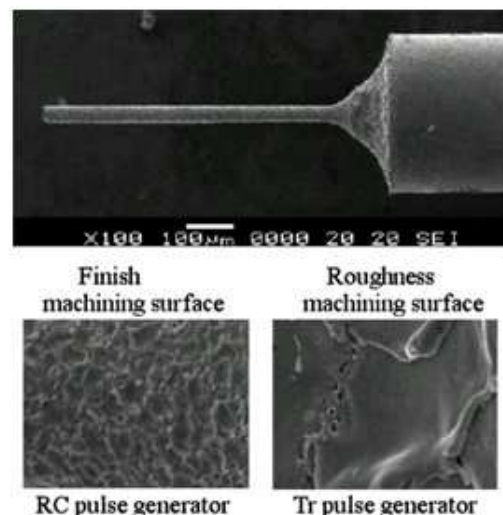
View of micro electrode tool machining by the twin-wire EDM system [122].
